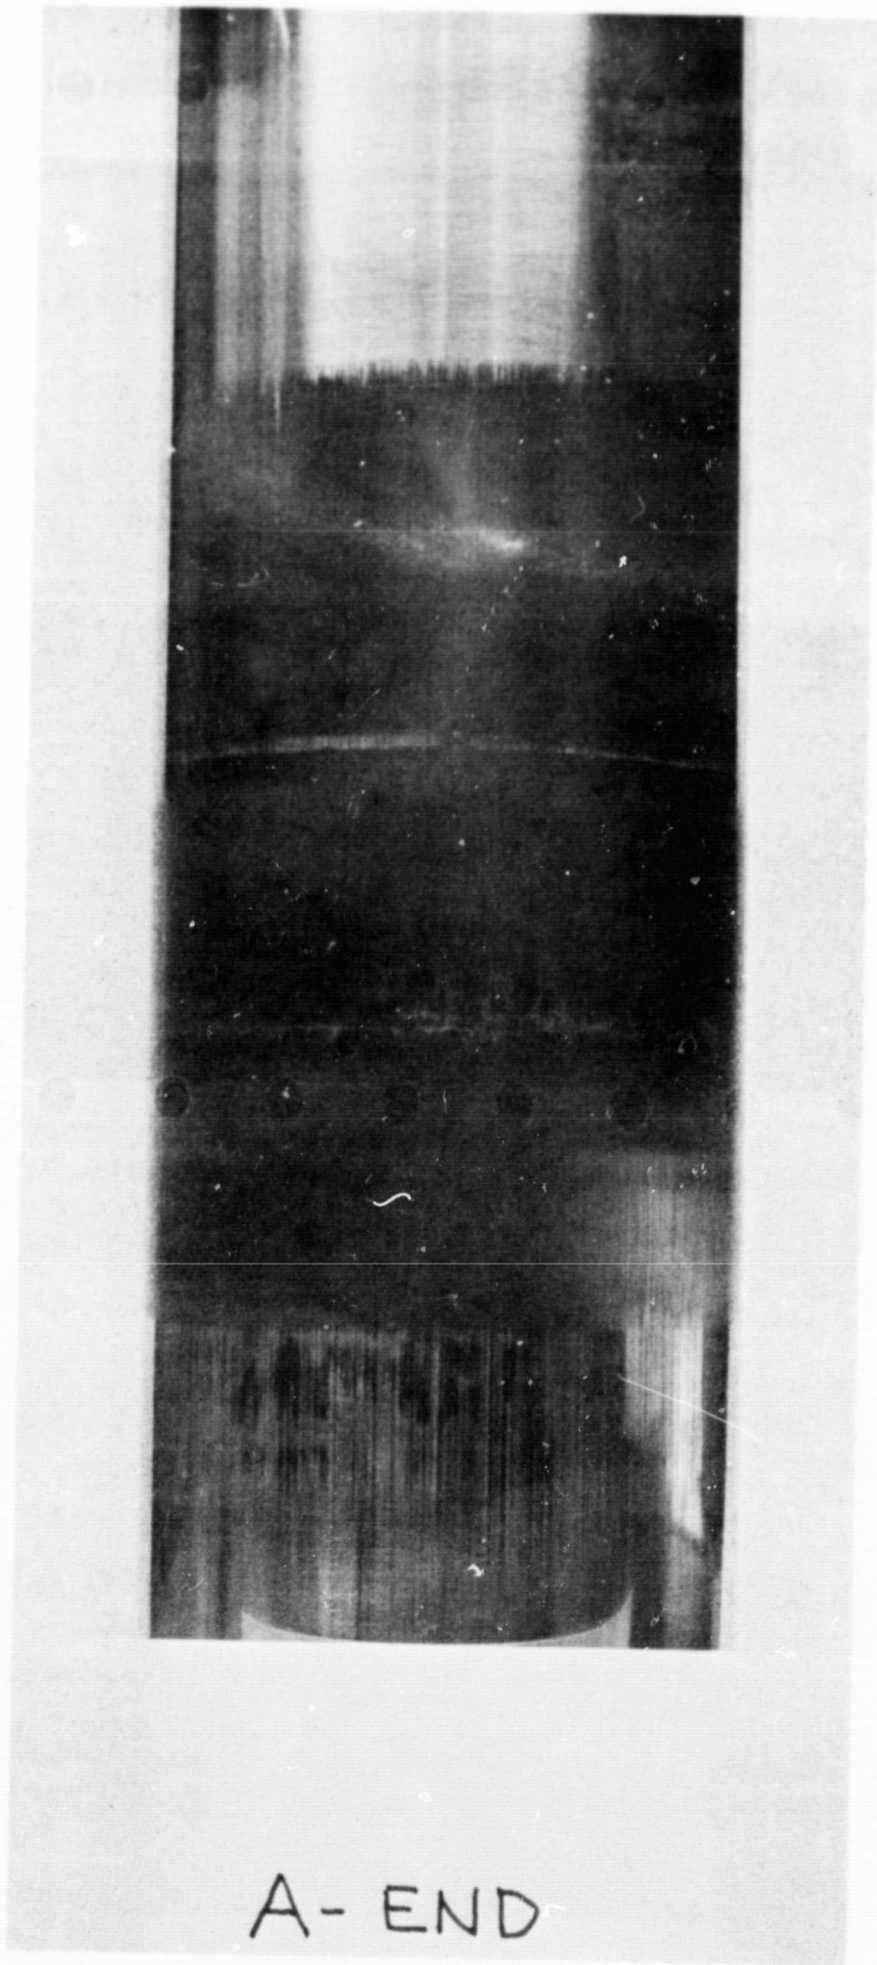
Piston Rod, A-End, Three-Inch Reed Seal
